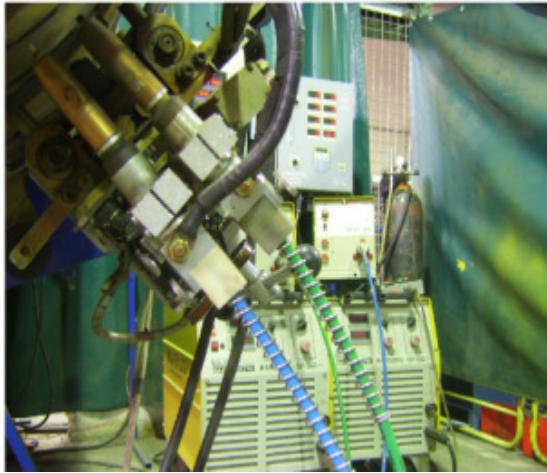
The welding system with the rectifiers used in the experiments
